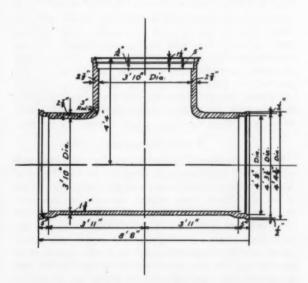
Cross section of five-ton faucet tee pipe to be molded with strickles.
